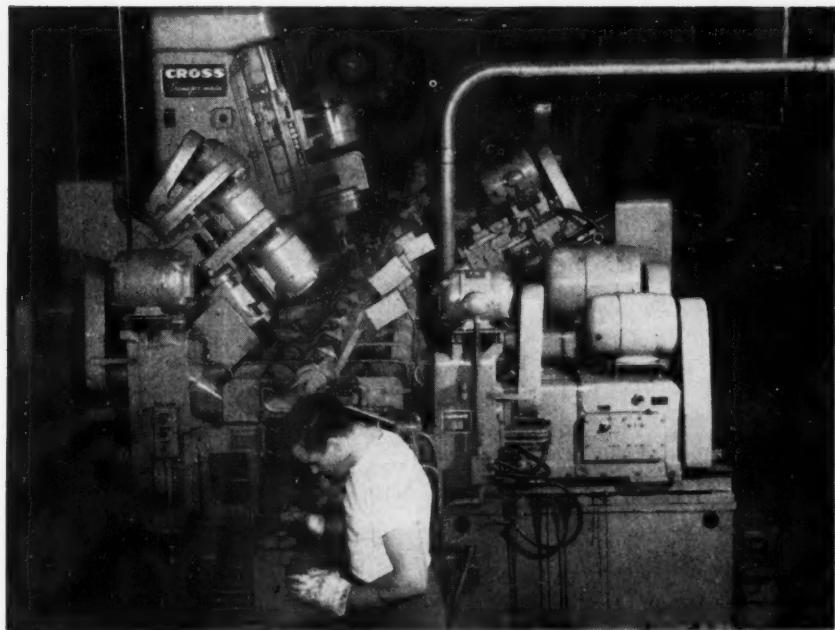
Opposite end view of the 92-foot transfer machine line.
